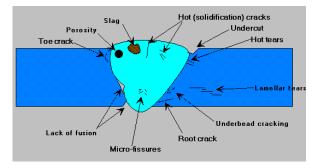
Types of defects on weldments (Fontana, F.G., 1987)
